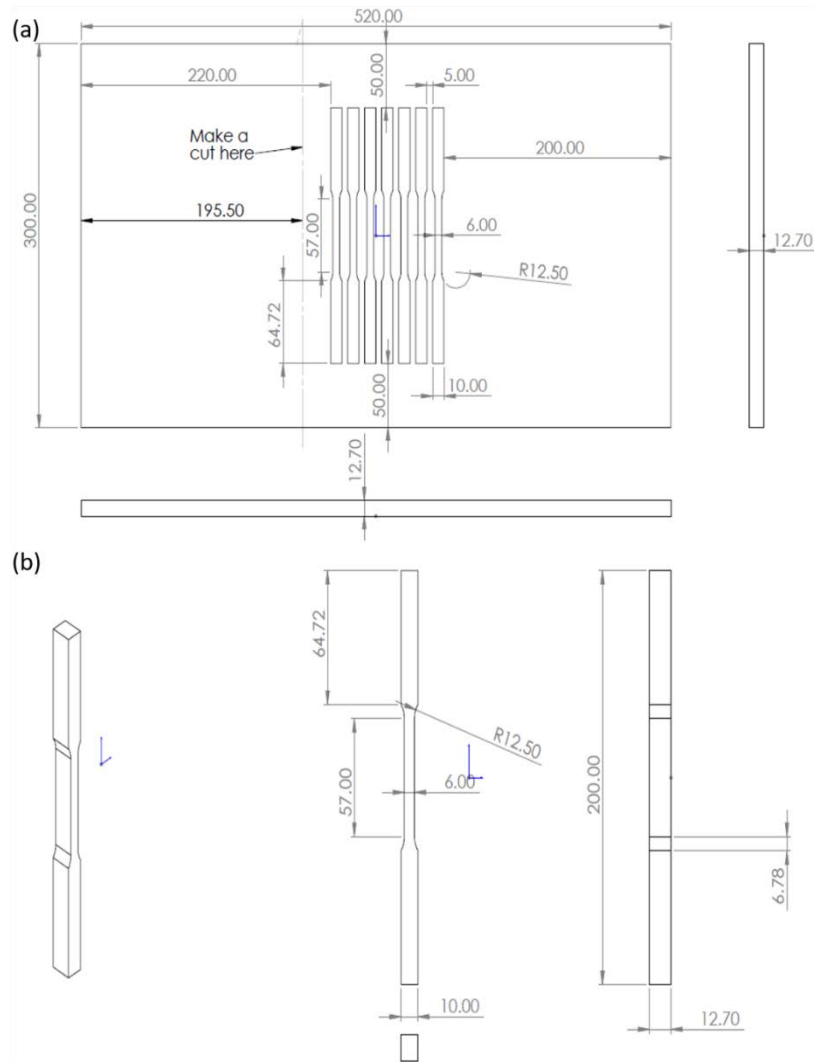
(a) Tensile sample extraction locations on welded plates (unit: mm) and (b) drawing of extracted tensile samples (unit: mm) from isometric, side, and front view (left to right)
